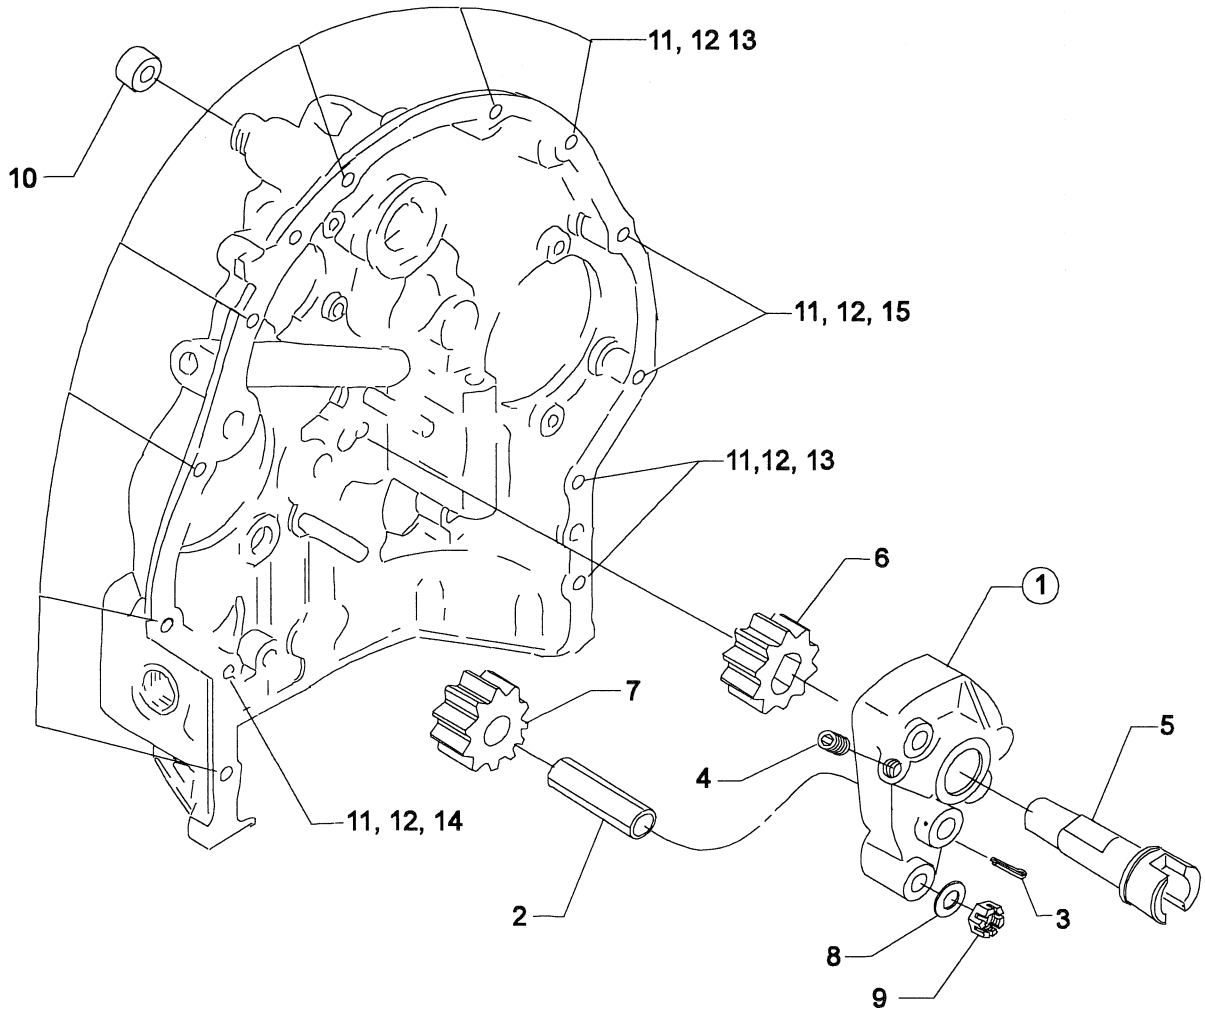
OIL PUMP ASSEMBLY AND ACCESSORY HOUSING ATTACHING PARTS
